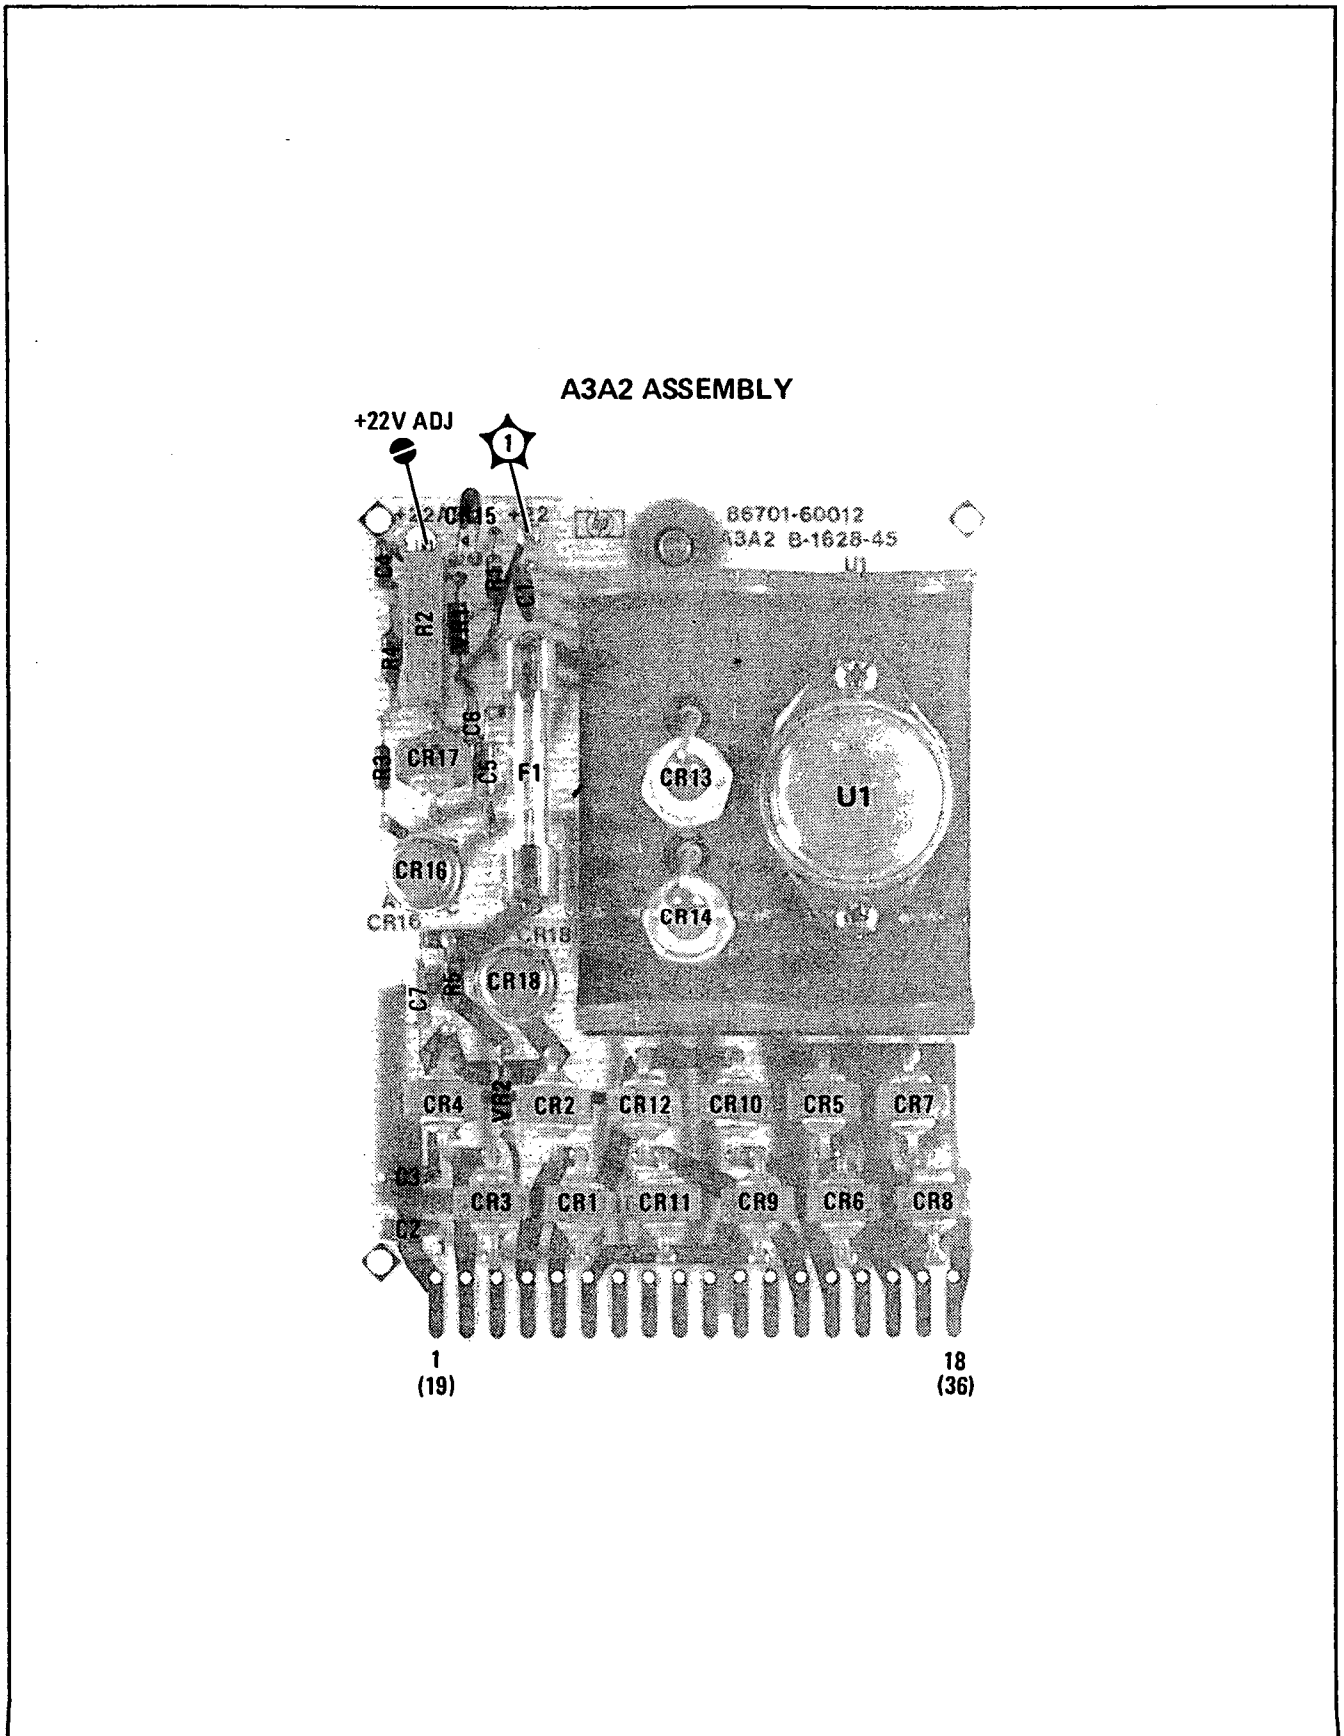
A3A2 Rectifier Assembly Component and Test Point Locations
